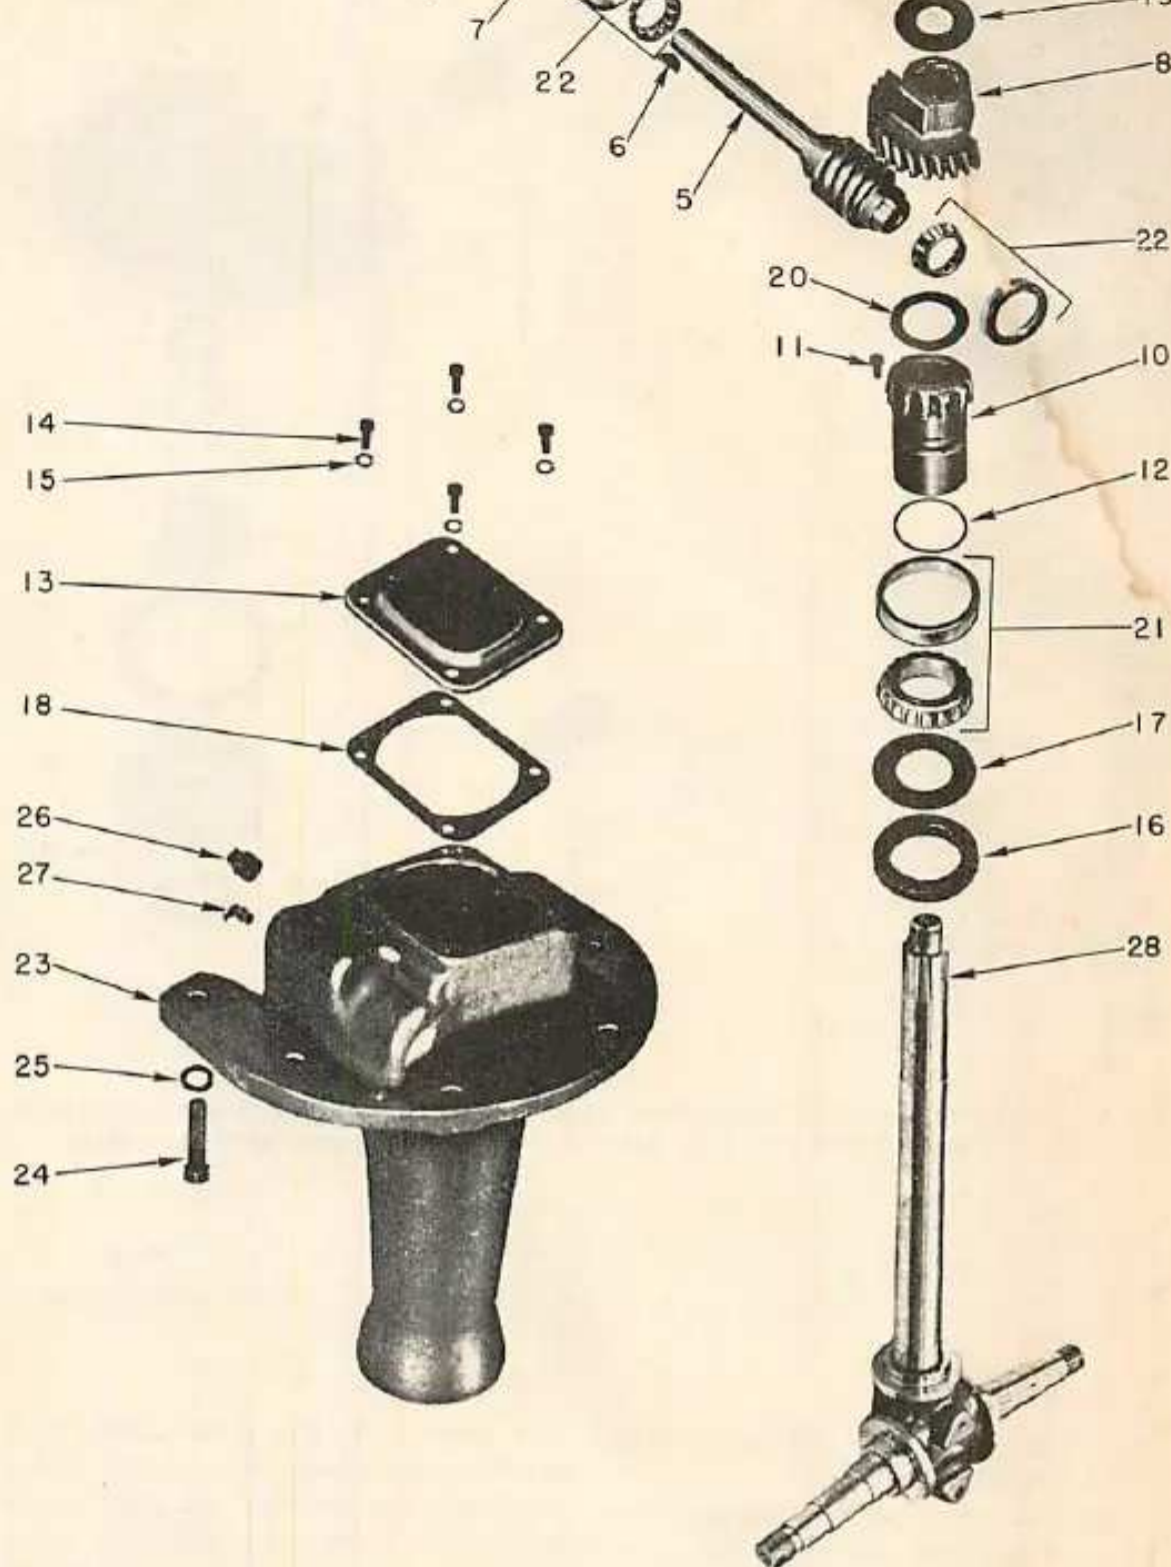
Exploded view of dual wheel tricycle front support and related parts as used on manual steering models. Refer to Fig. O12 for front support for power steering models.
